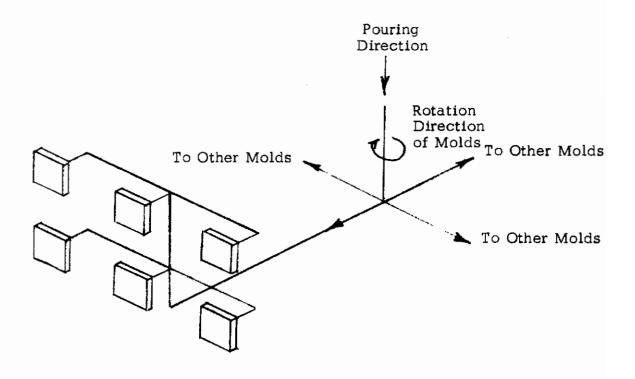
Schematic of Gating System Employed for Test Castings poured at Oremet
